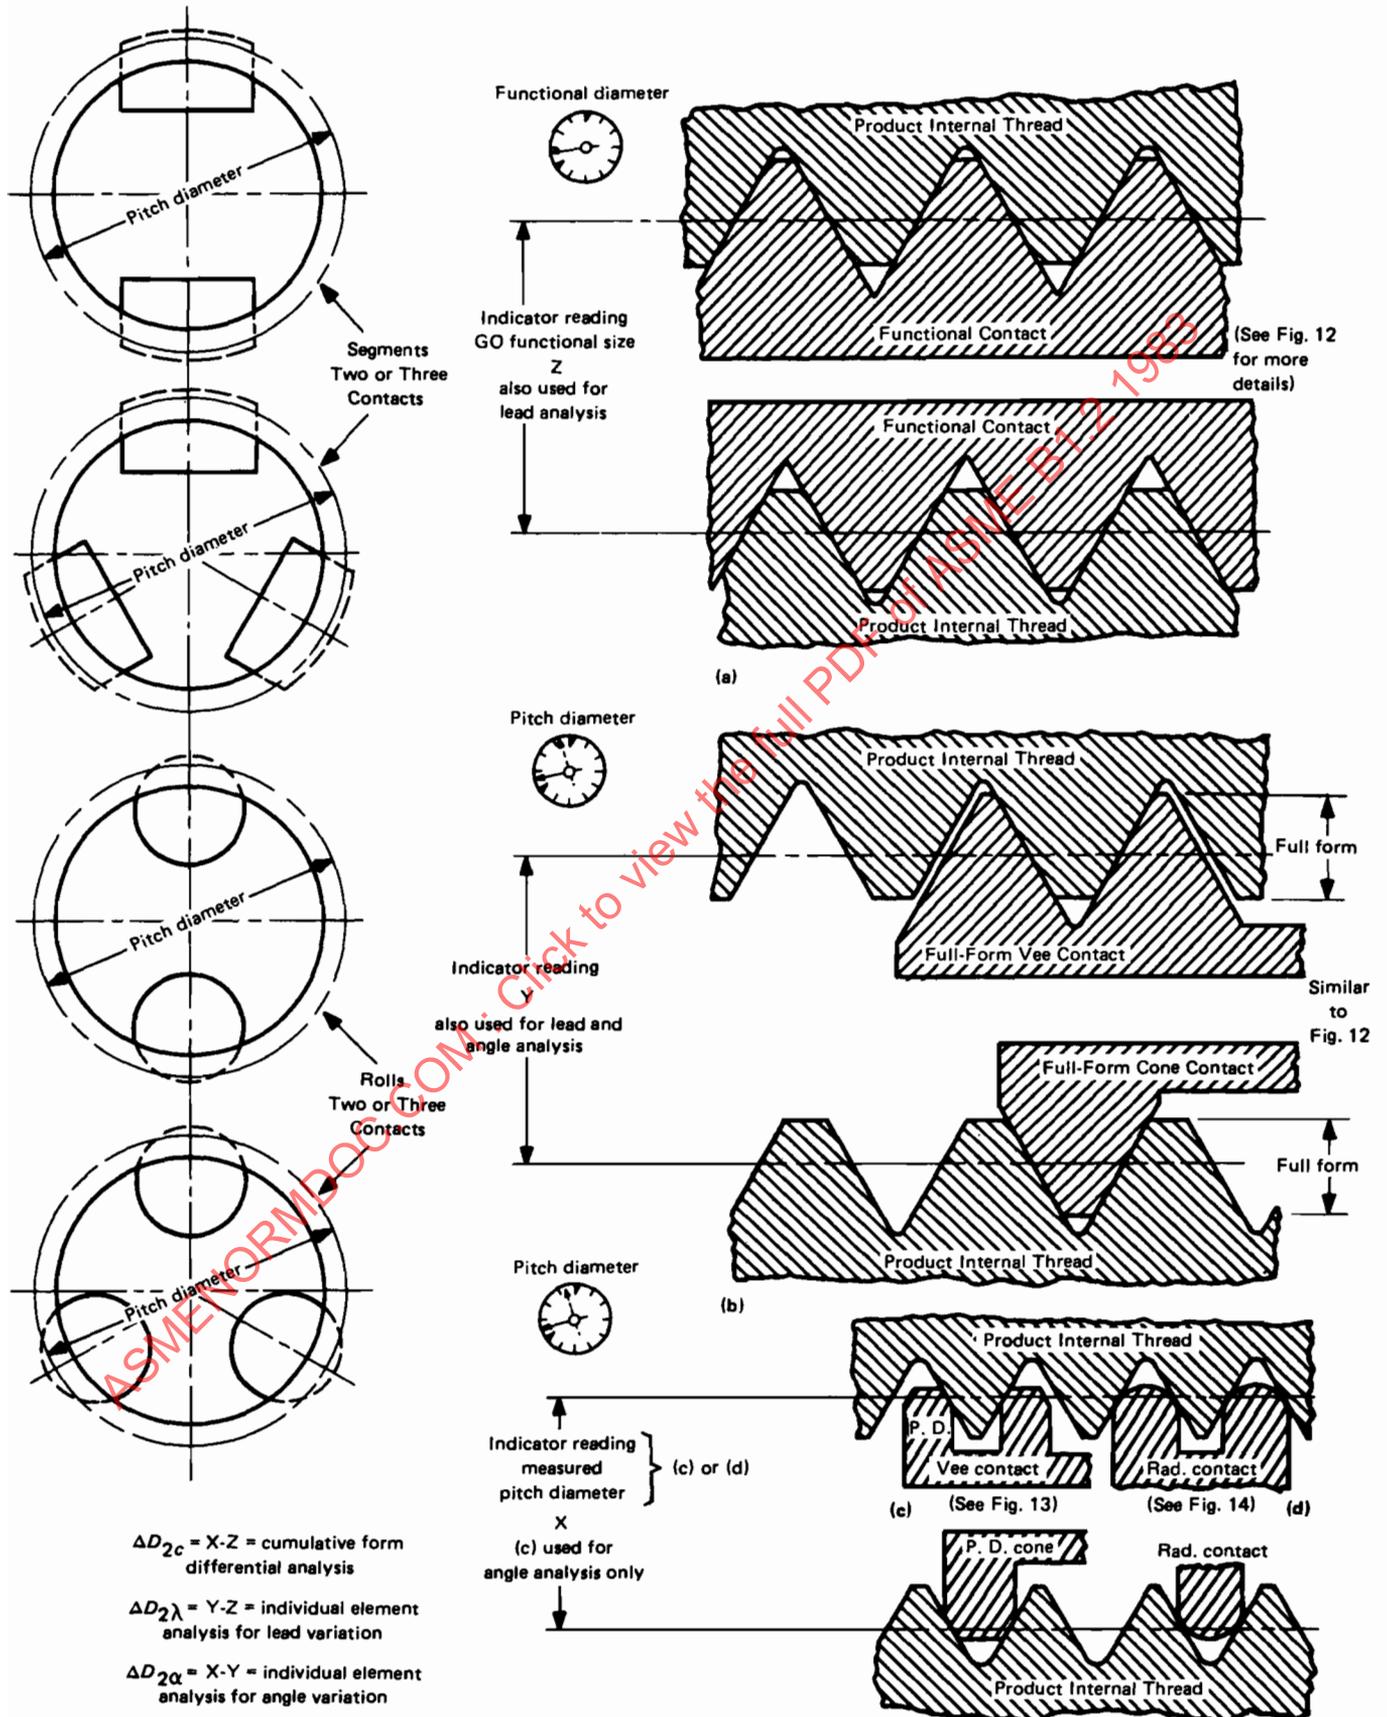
INDICATING THREAD GAGES — DIFFERENTIAL GAGING
